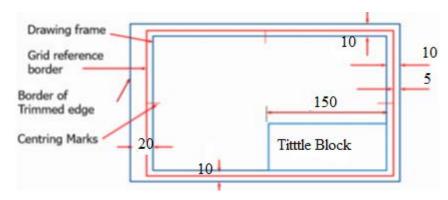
Layout of drawing sheet (dimensions in mm)
